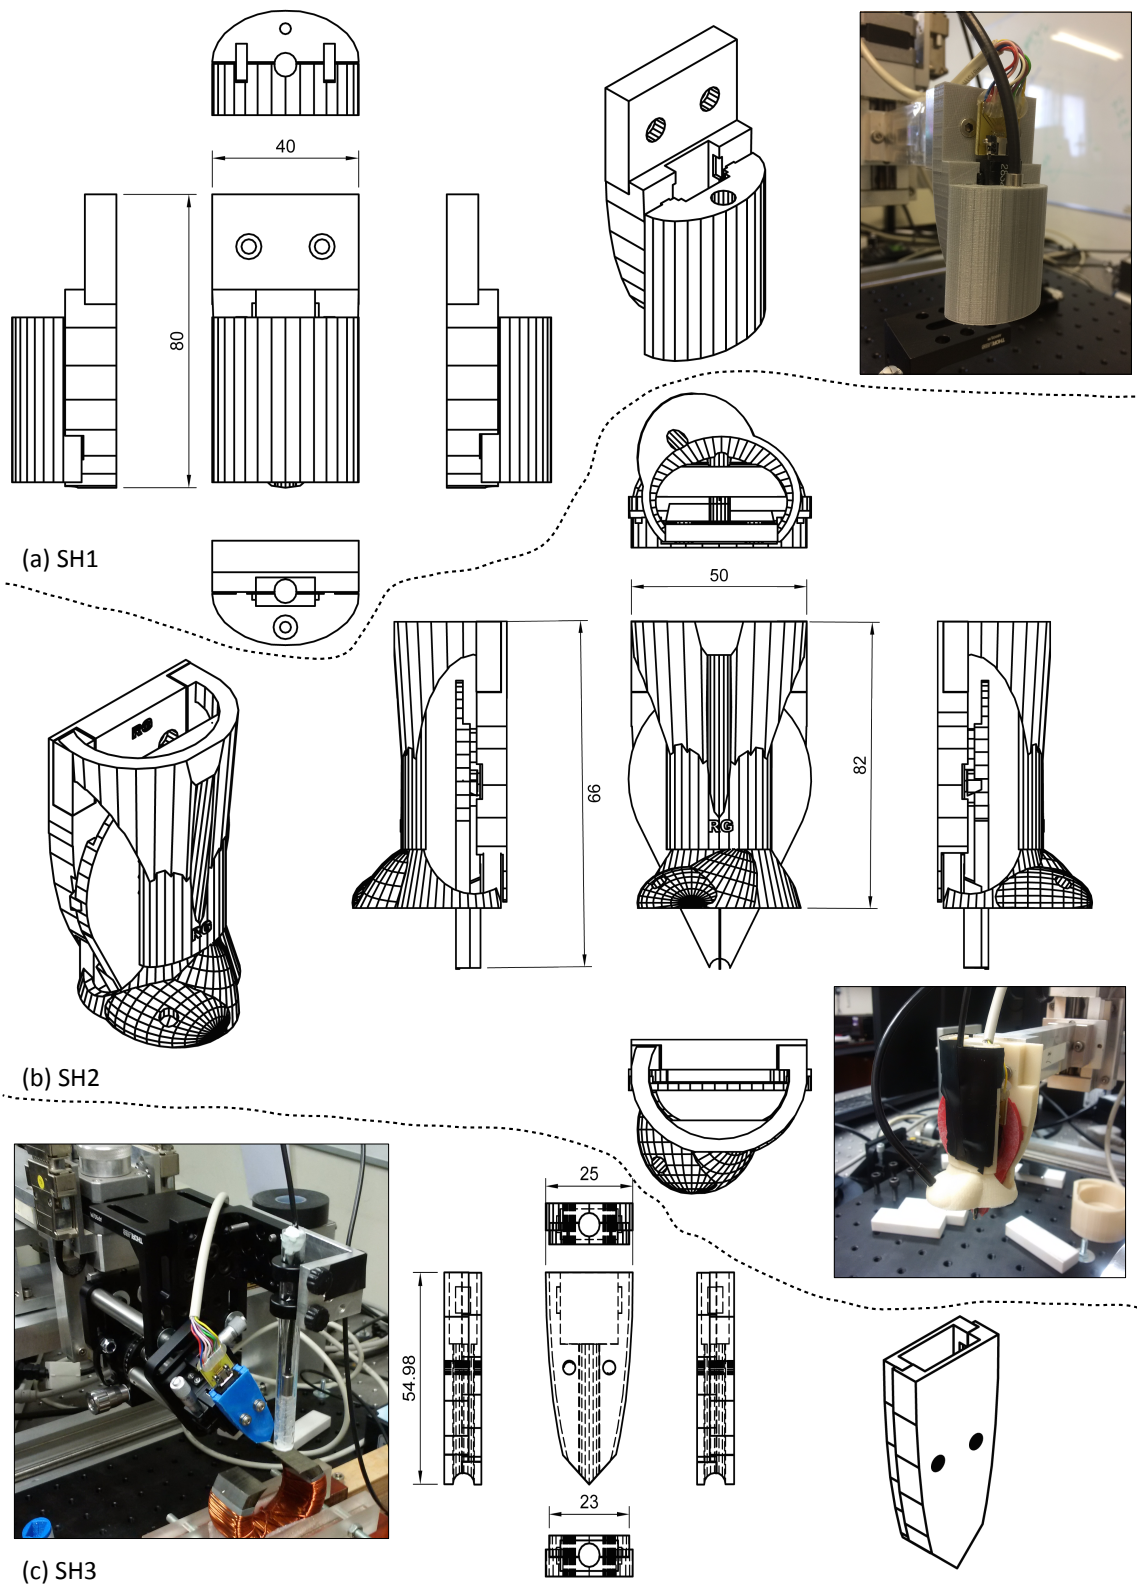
(a) Sensor Head Version 1 illustration and photograph, (b) Sensor Head Version 2 illustration and photograph, (c) Sensor Head Version 3 illustration and photograph. Dimensions in mm.
